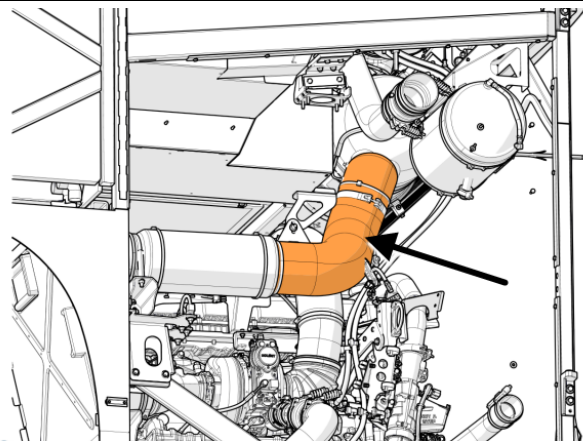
REMOVE THIS EXHAUST PIPE SECTION
